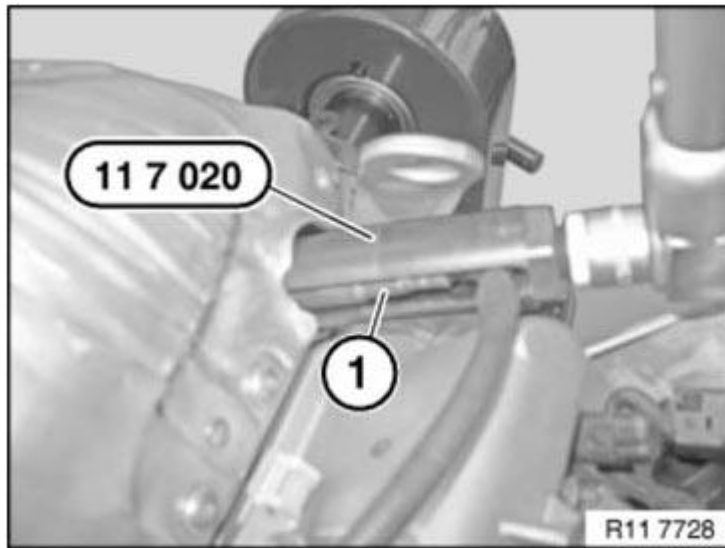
Tightening Monitoring Sensor Using Special Tool 11 7 020
